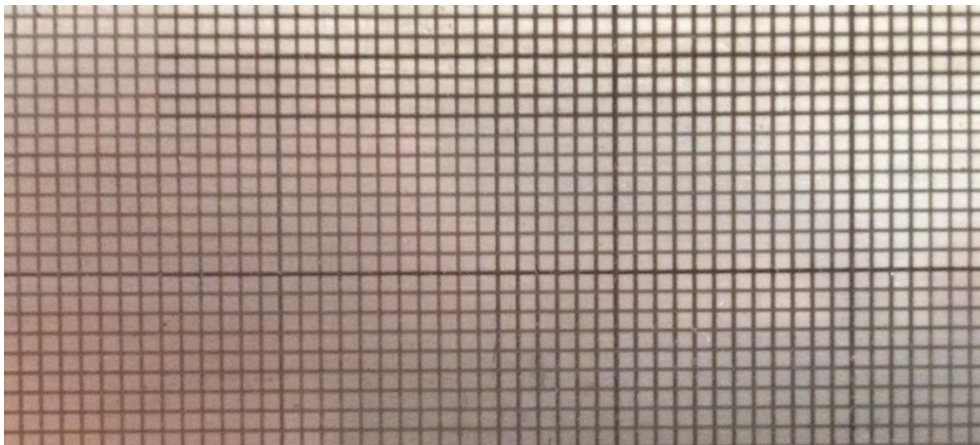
1x1mm laser marked grid on a stainless steel sheet
